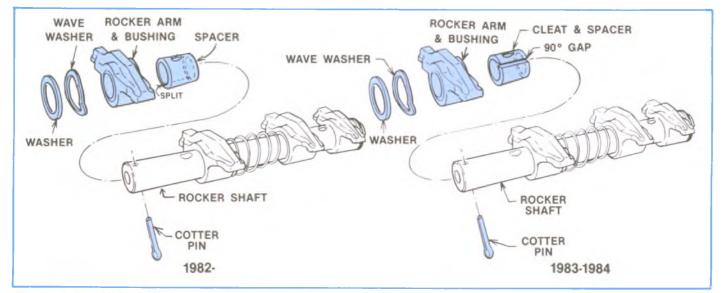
, 1982-1984 Rocker Arm Assembly.
